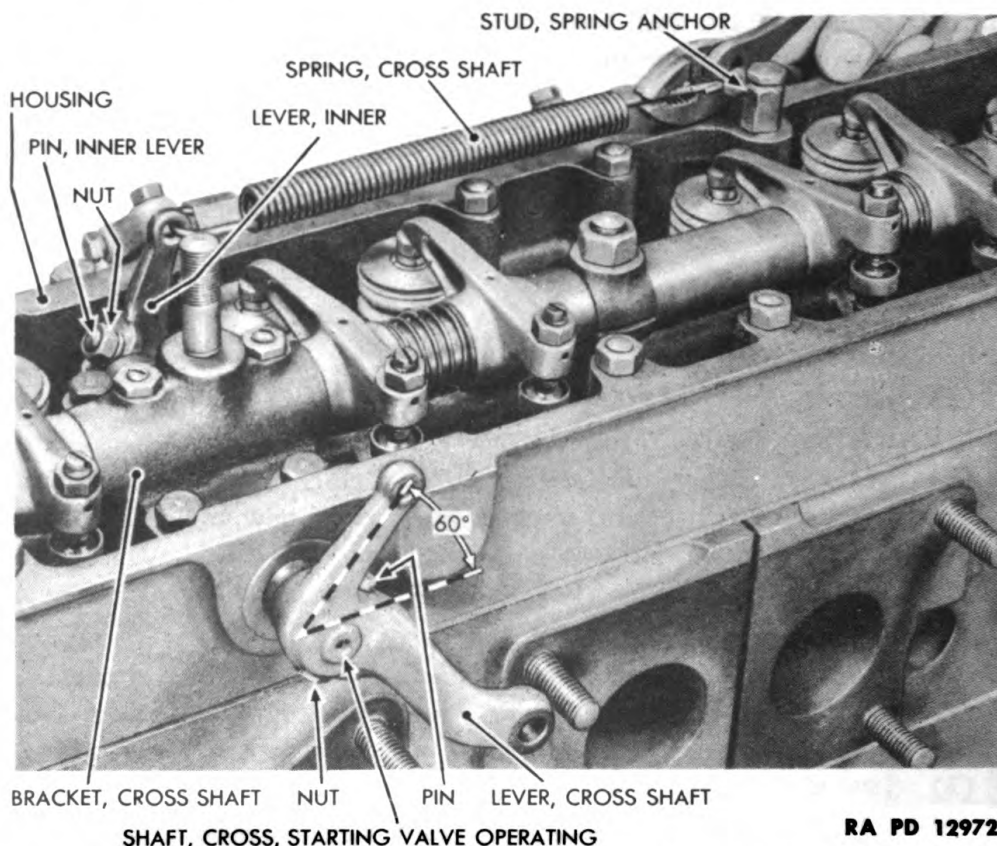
Installation of Starting Valve Operating Cross Shaft and Related Parts
